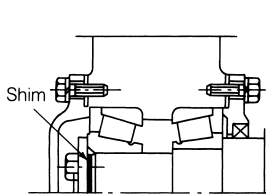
DB Arrangement whose Clearance is Adjusted by Inner Rings.
